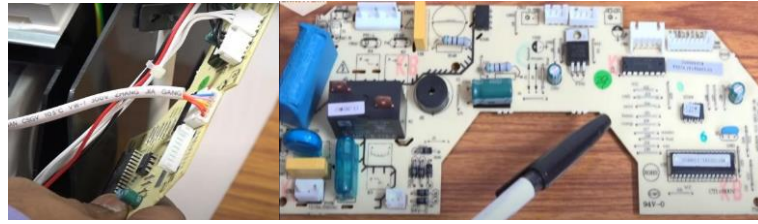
Indoor unit Printed Circuit Board (PCB)
